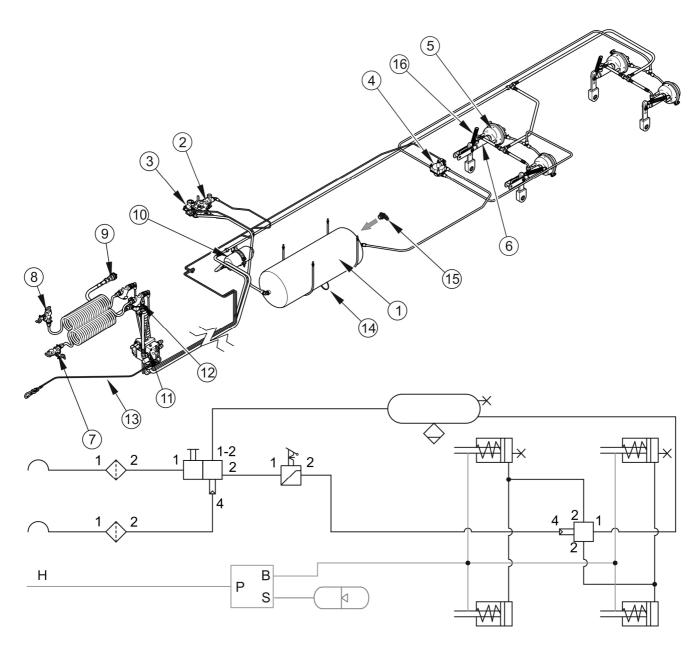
Design and diagram of combined braking system (double conduit pneumatic braking system + hydraulic braking system with mechanical protection valve)
